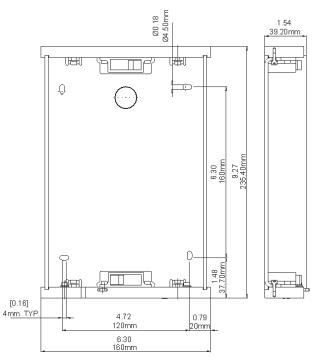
Dimensional Drawing, Surface Mount Wall Control Unit
